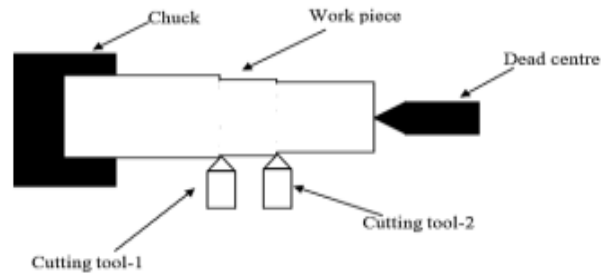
Schematic representation cutting tools mechanism (Pradeepkumar et al, 2015)
